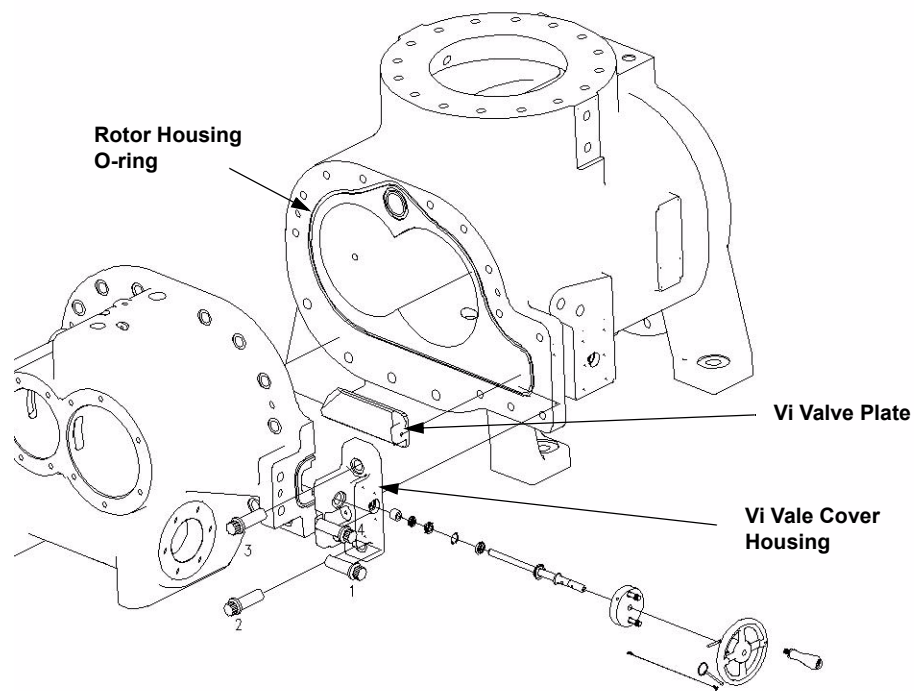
HANDWHEEL ACTUATED VI CONTROL - TYPICAL
